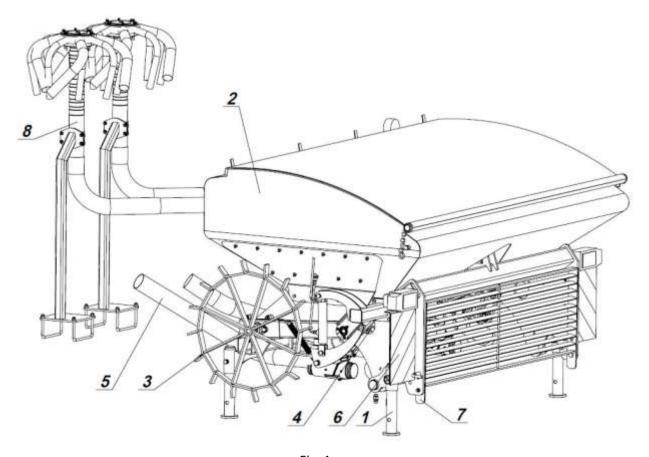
1-Frame assy., 2-box assy. 3-seeder drive, 4-drive of sowing unit, 5-air transport assy., 6-lighting assy., 7-platform, 8-manifold,
